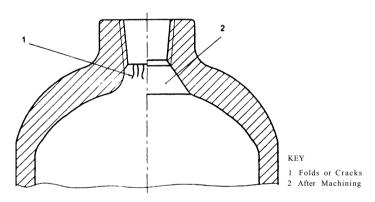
CYLINDER SHOULDERS FOLDS OR CRACKS BEFORE AND AFTER MACHINING
